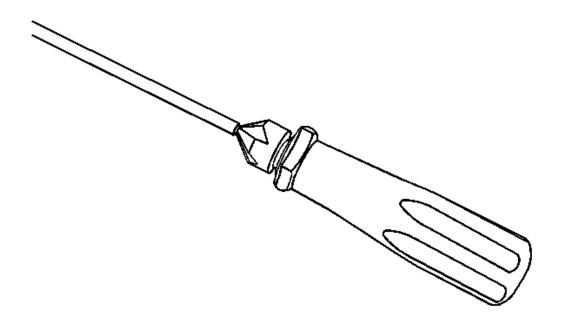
Chamfering Pipe Using De-Burring Tool Courtesy of GENERAL MOTORS CORP.
